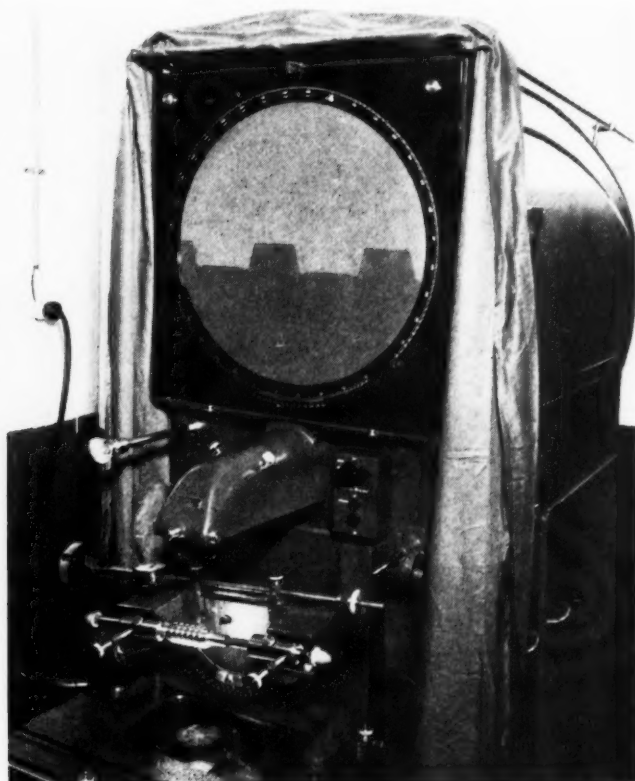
Equipment for Inspecting Threads, Gear Teeth, and Other Parts of Gages and Tools
